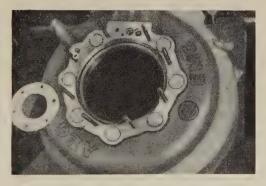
Converter gearbox with the core stoppers removed to the outside.
